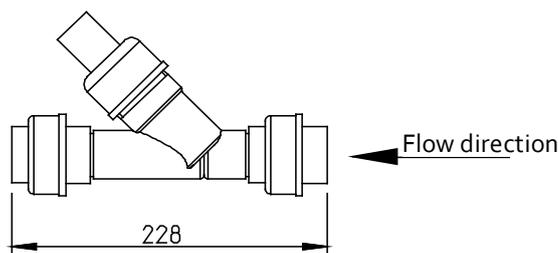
Dimensional drawing - pH/redox measuring point DN 25
